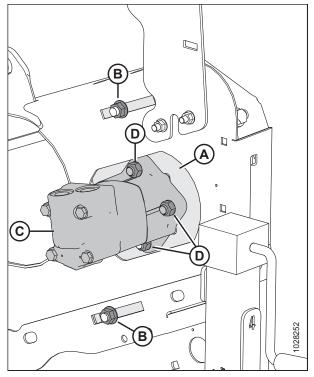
Knife Drive Motor – Double-Knife Header, View from Rear
